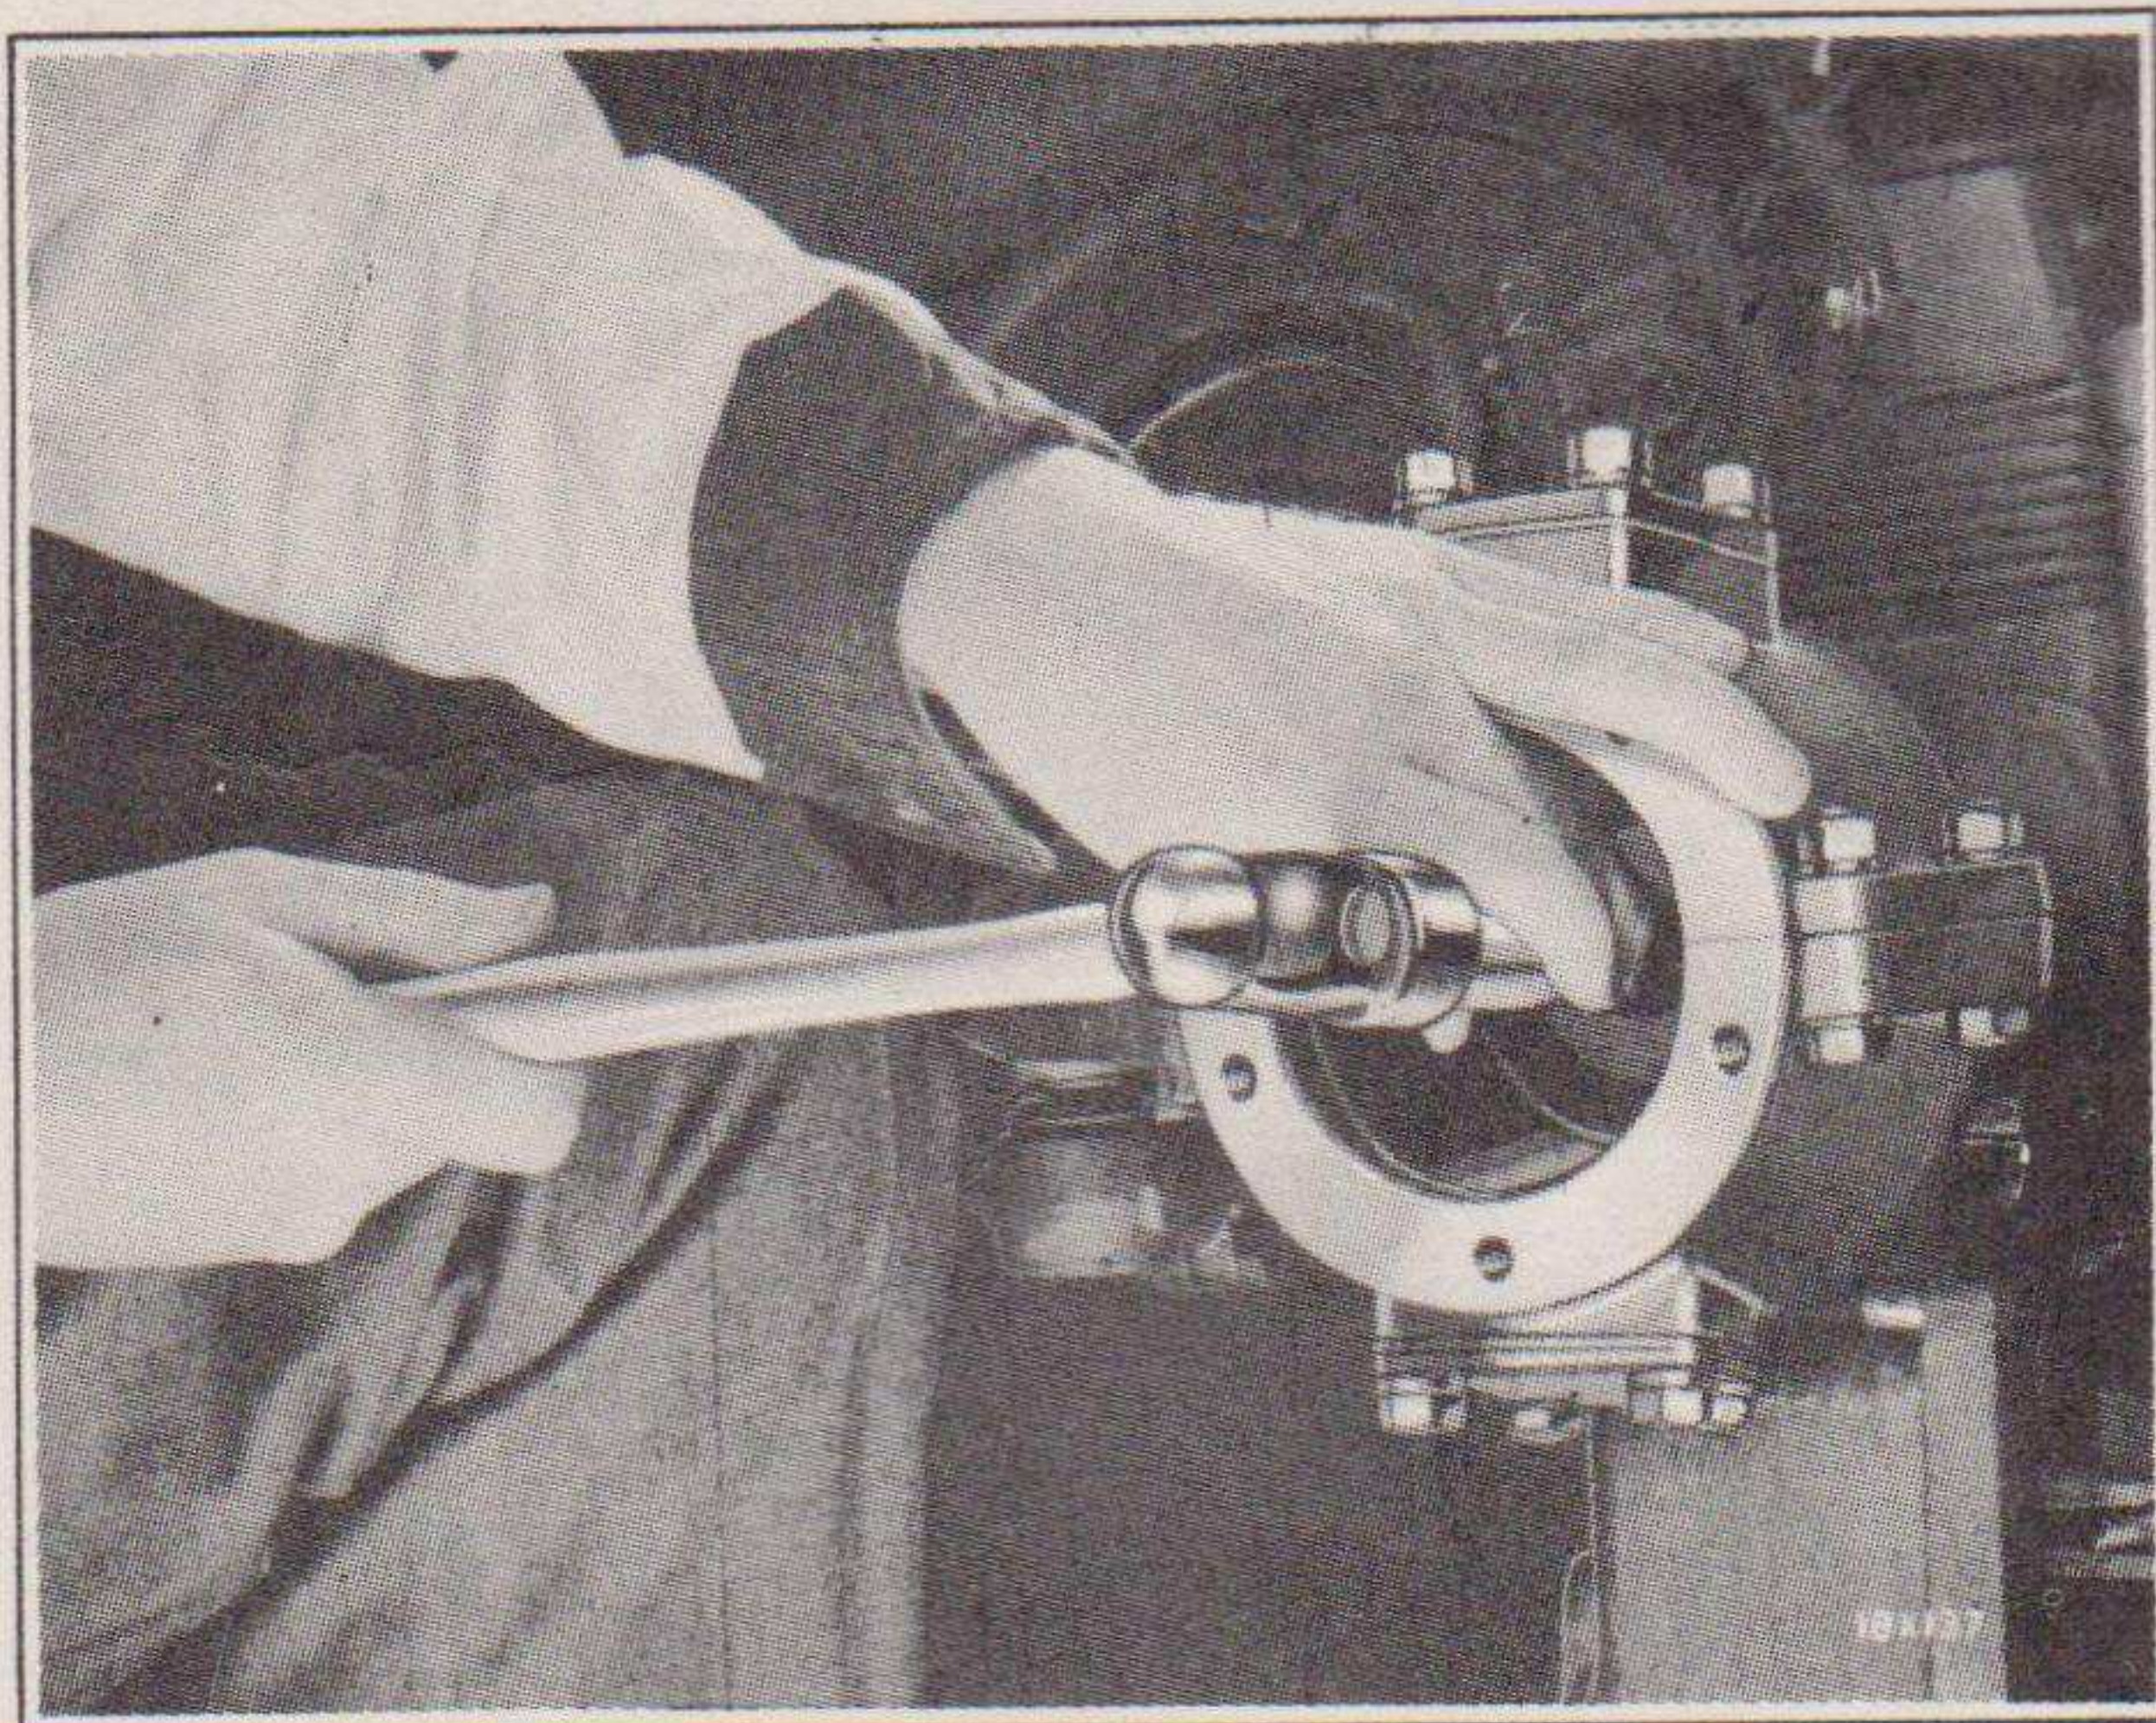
Installing Universal Drive Shaft Oil Seal
